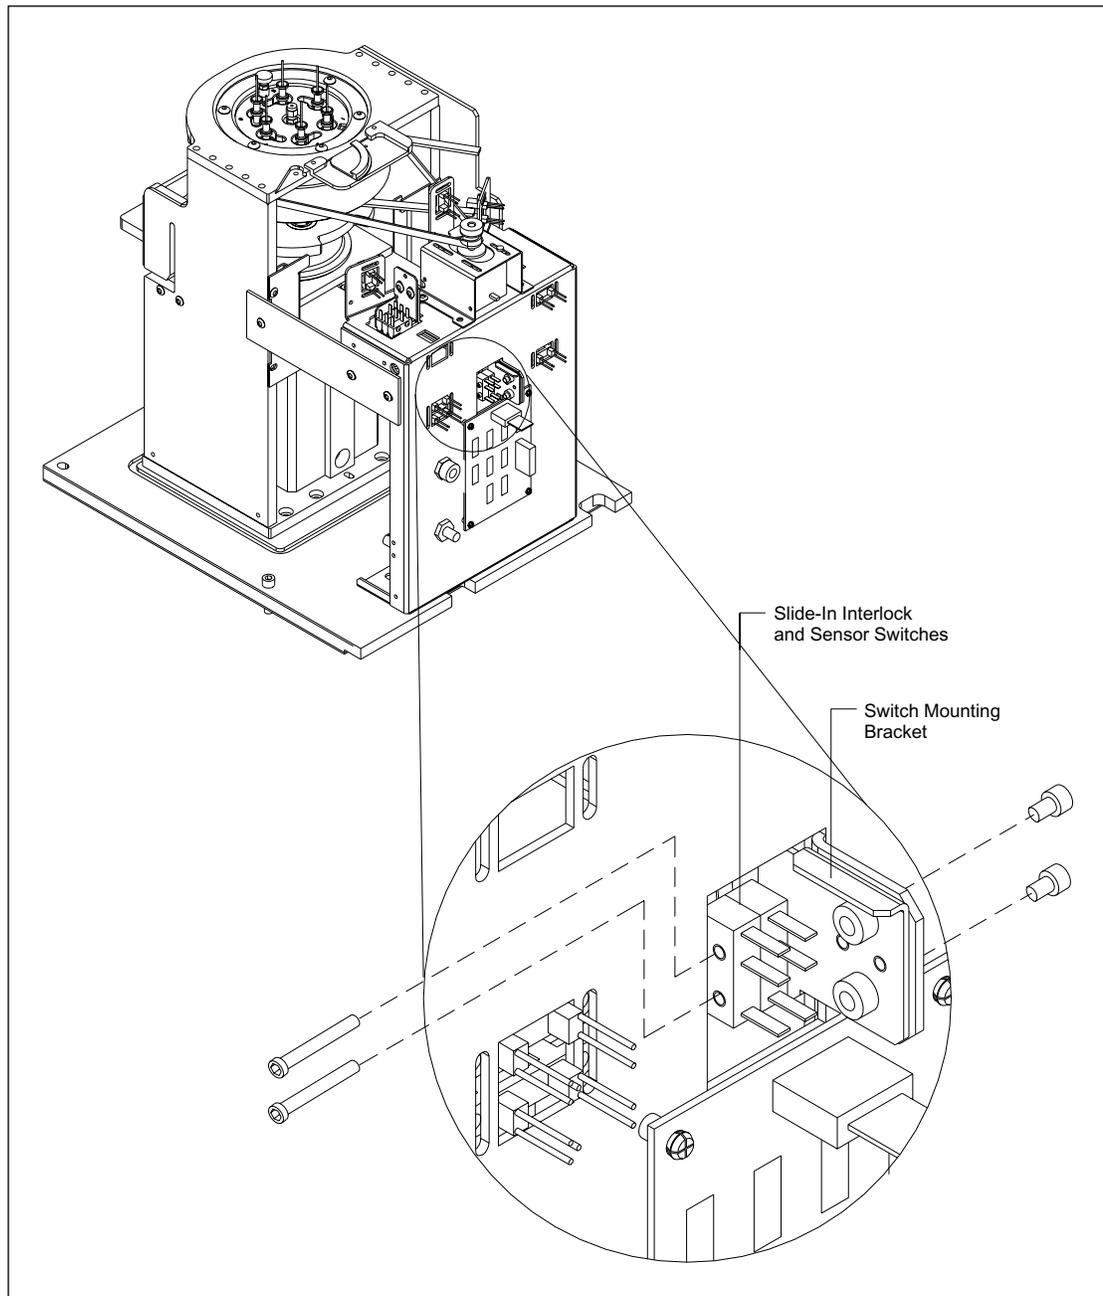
Anode Slide-In Interlock and Sensor Switch Mounting.
